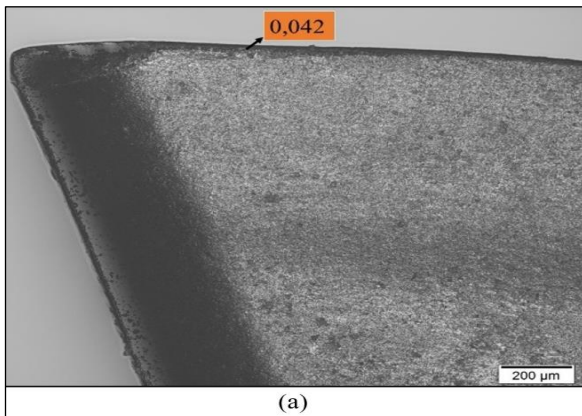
Wear on the main flank with insert 0,4 mm: (a) Without sealant.
